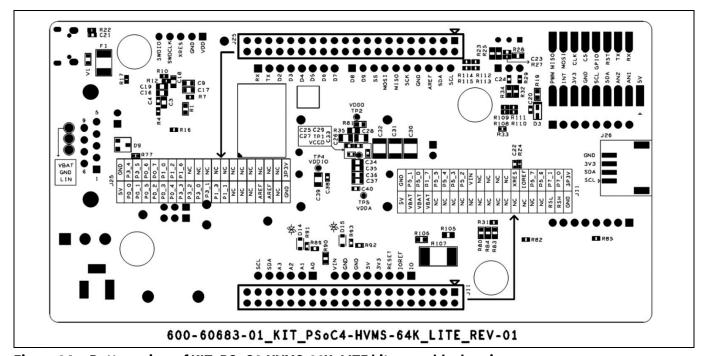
Bottom view of KIT_PSoC4-HVMS-64K_LITE kit assembly drawing
